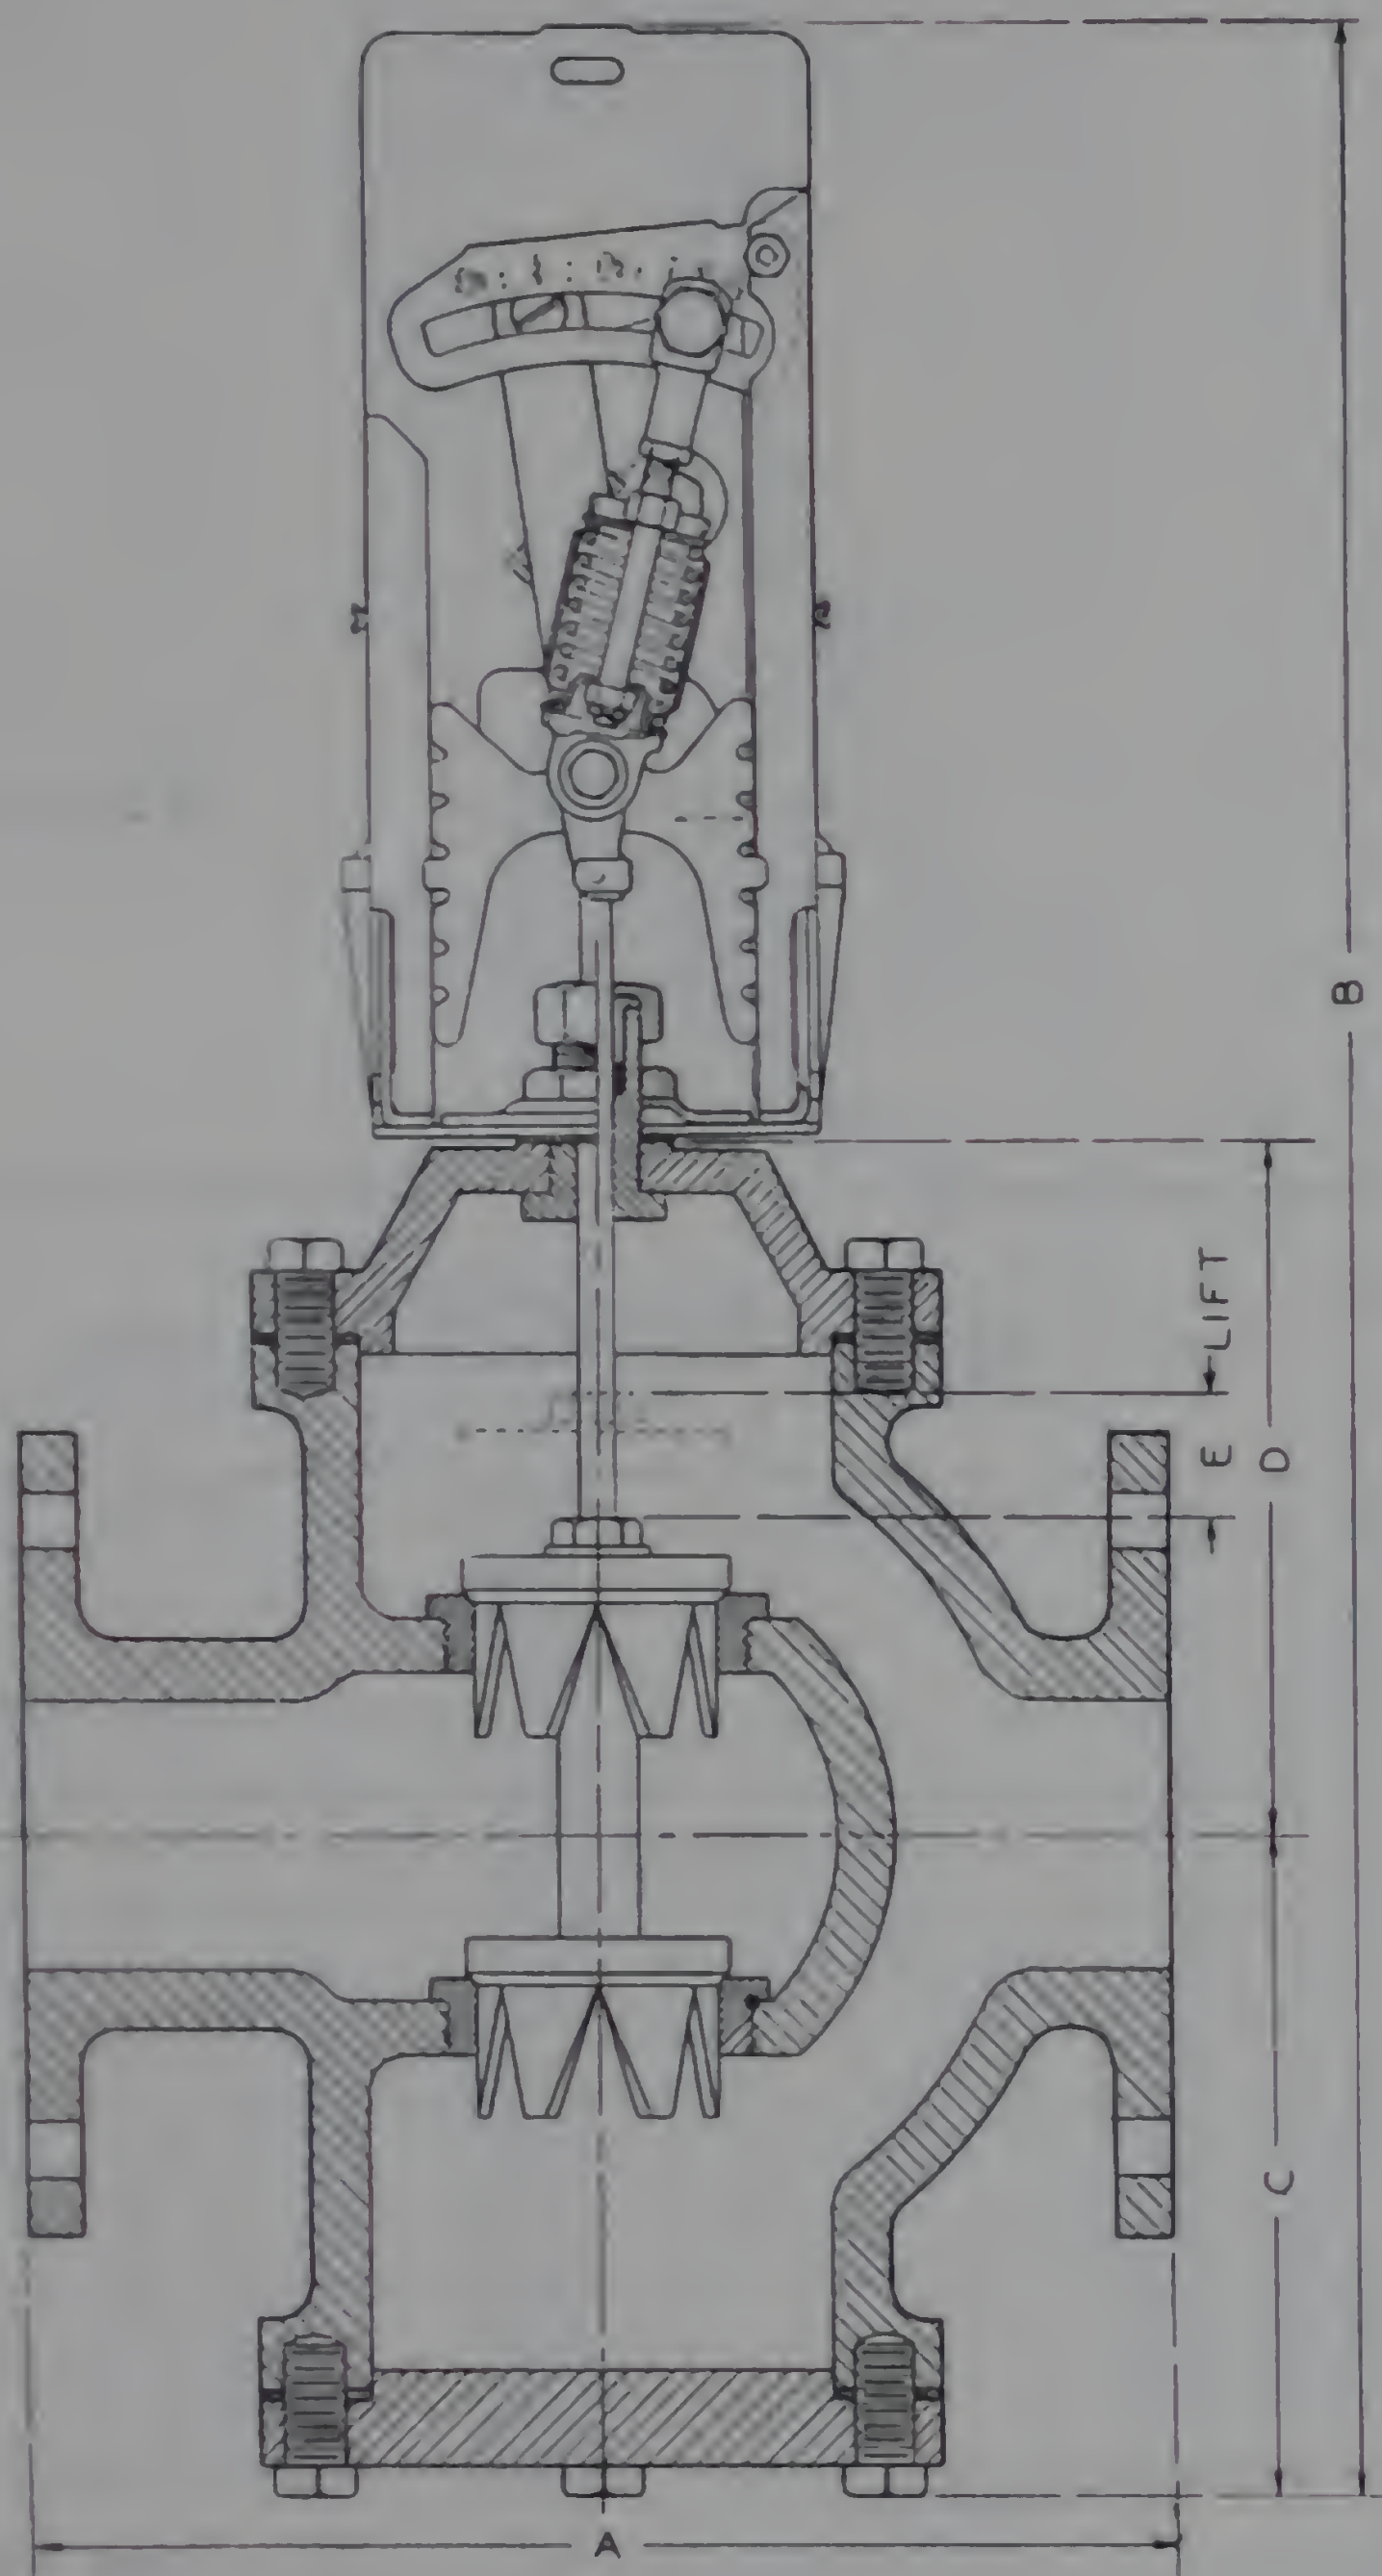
Dimensional drawing of flanged type K901B Motorized Valve
